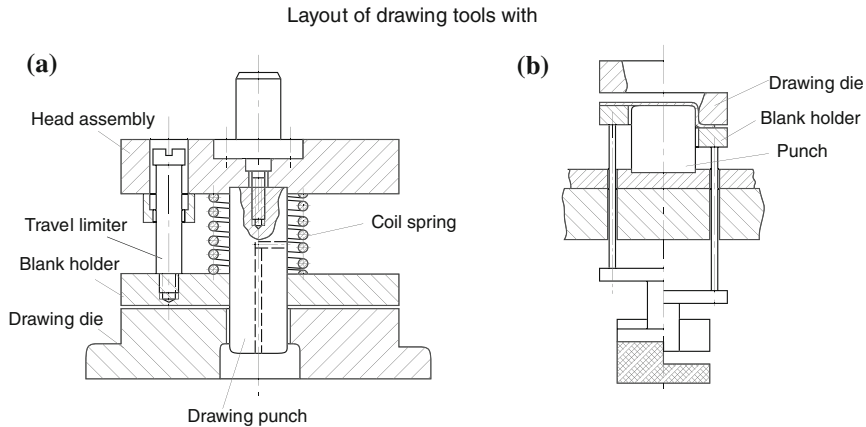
Blank holder design on drawing tools (acc. to Hilbert/Wilhelm [HILB70], [WILH75]), (a) spring operated blank holder (b) blank holder drive unit over draw-cushion
